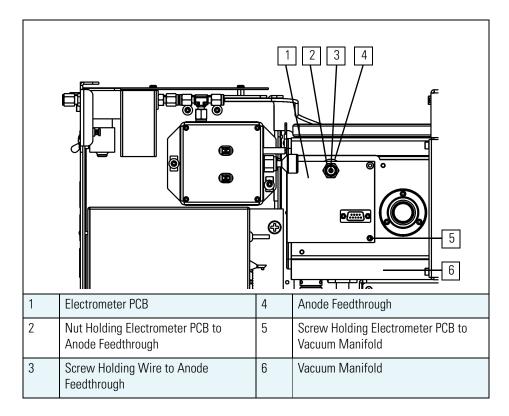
Electrometer PCB with Electrometer PCB Cover Removed (Left Side)
